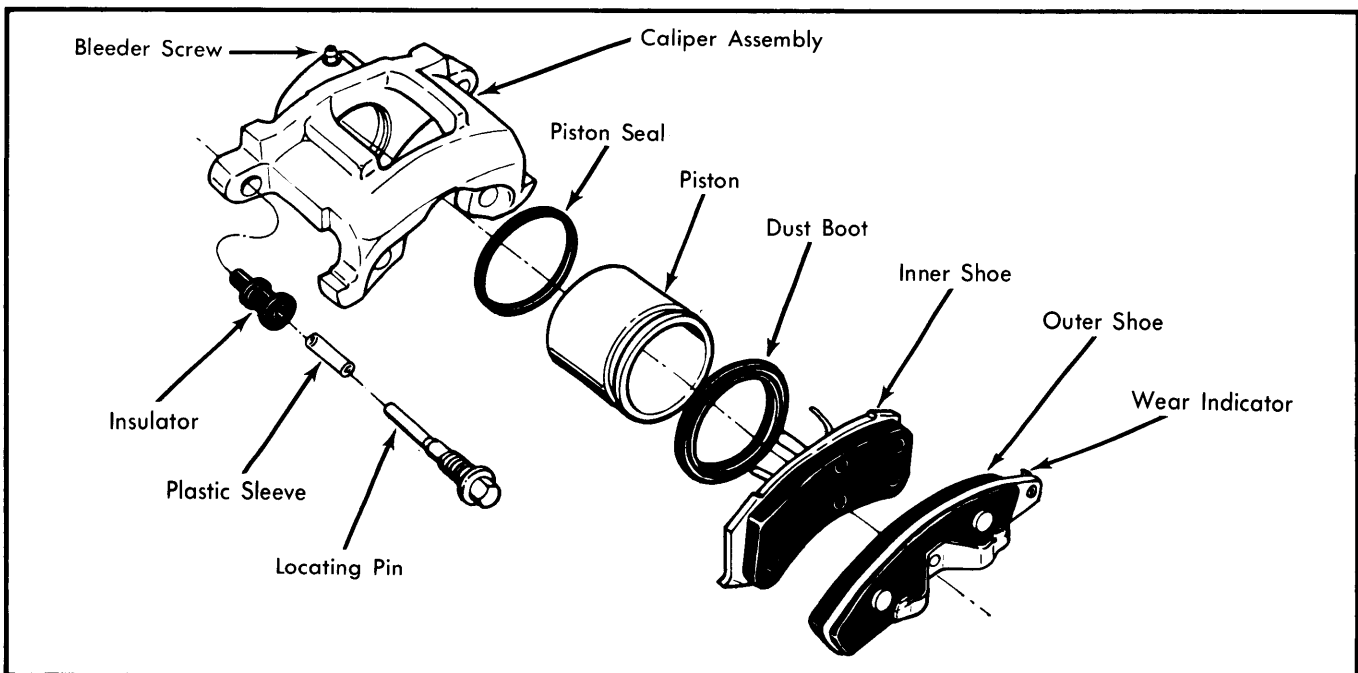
Exploded View of Ford Motor Co. Front Pin Sliding Caliper Assembly
